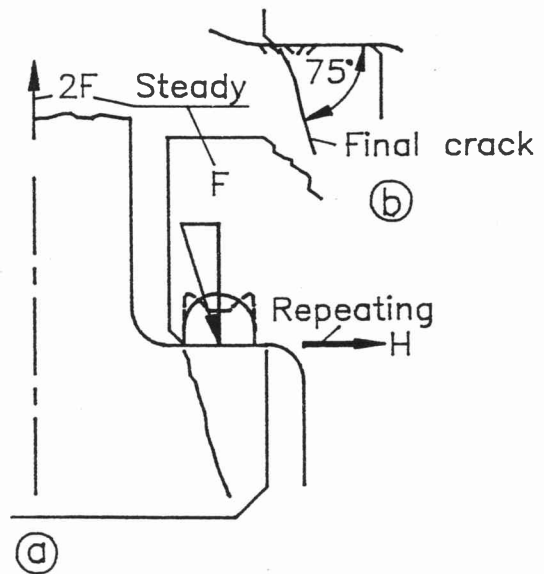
(a) Crack in T-head contact area (only right half shown) under steady vertical load F and repeating horizontal load H , (b) enlarged contact area.
